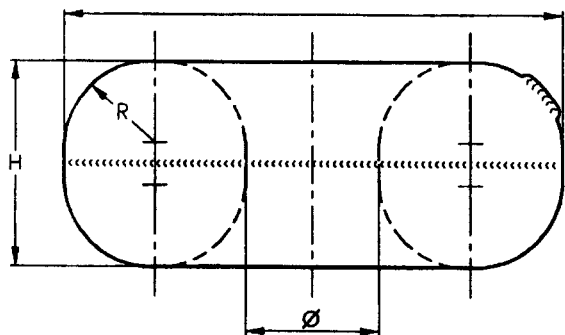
B CONTAINERS WITH CIRCUMFERENTIAL WELDS ONLY AND VALVE BOSS/PLATE FITTED TO THE END
